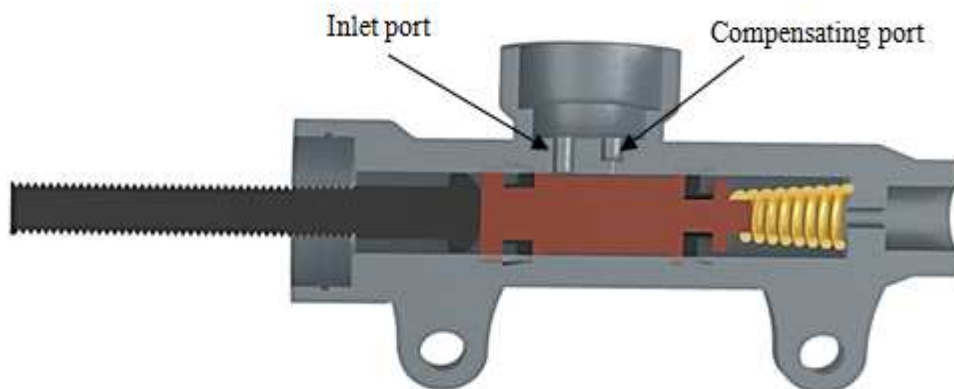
Brake Actuation Position of Master Cylinder Assembly (CAD Model-Sectional View).
